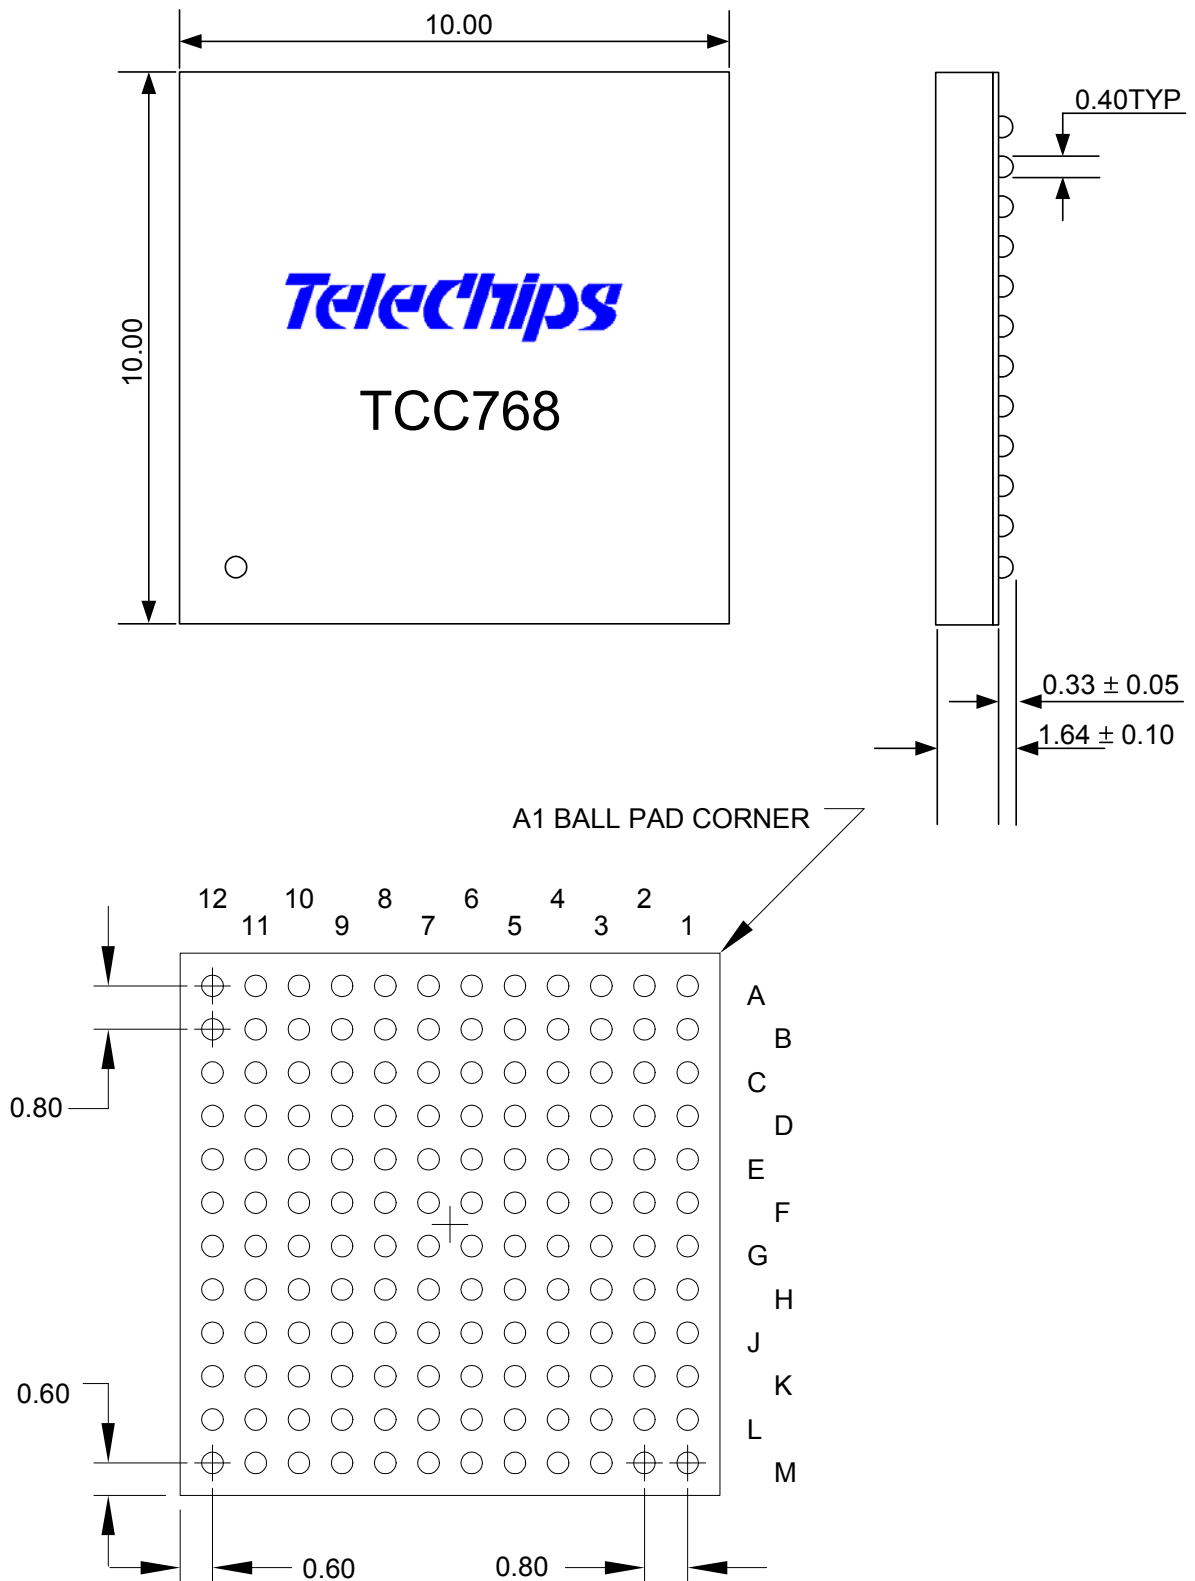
TCC768 Package Dimension (144-FPBGA-1010)
